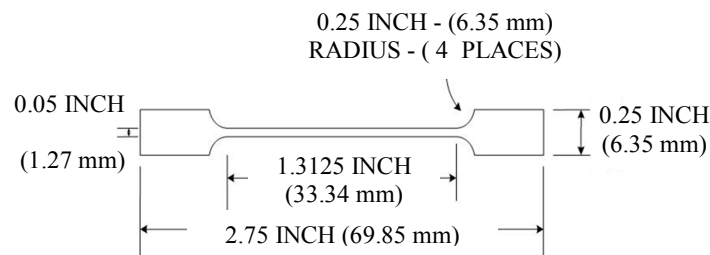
Drawing of the selected shape for Ni-rich NiTi fatigue test specimen.
